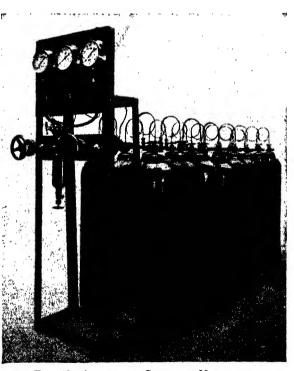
ACETYLENE CYLINDER MANIFOLDS
